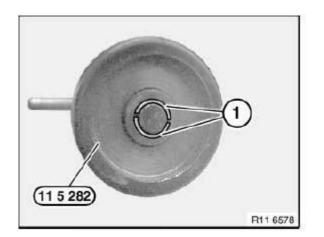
Identifying Valve Keys And Special Tool 11 5 282 Courtesy of BMW OF NORTH AMERICA, INC.
